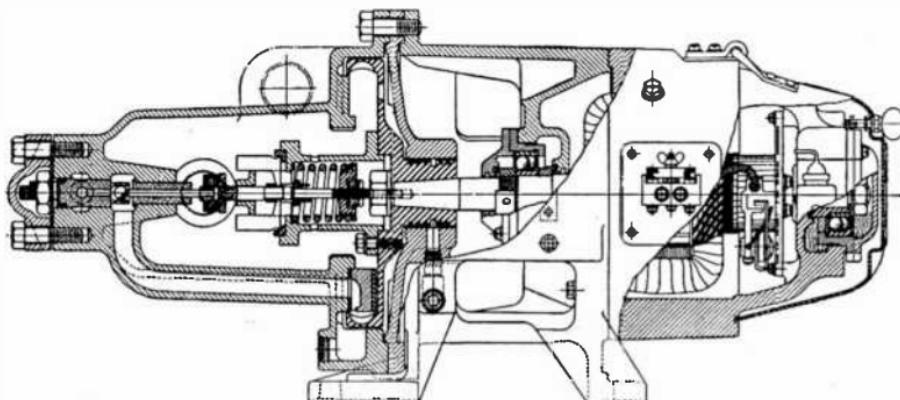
,476.—Westinghouse 32 volt, 500 watt locomotive head light unit; sectional view showing interior construction. The speed of the unit is controlled by a fly ball governor which is bolted to the turbine disc as a complete unit. This governor acts directly upon the governor valve stem without the use of any intermediate linkage. By means of this simple and reliable construction very close and stable regulation is obtained. The governor valve consists of a single seat against which a steel ball acts, the position of which is fixed by the governor, thus, admitting the exact amount of steam required for the load. A metal labyrinth ring gland is used to seal the shaft where it enters the turbine cylinder. The rings are of the piston type and require no adjustment. The dynamo is wound to deliver 32 volts d.c. from no load to full load at approximately 4,000 r.p.m. and will carry its rated load of 500 watts continuously.
